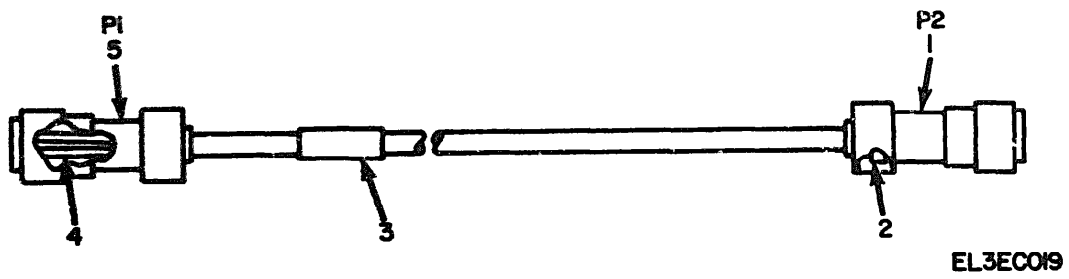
Cable Assembly, Special Purpose LM-114A (A1W2)
